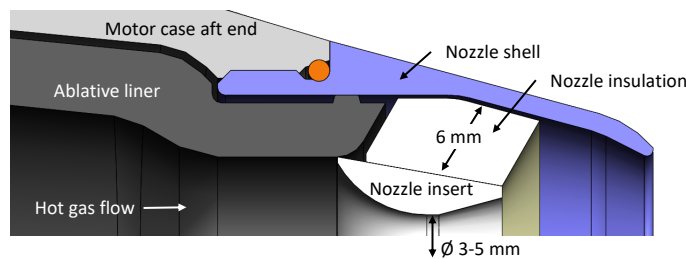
Section view of the nozzle, with the nozzle shell as a separate part. The nozzle assembly consists of a shell, insulator and insert. The nozzle shell connects to the aft end of the motor case with screw threads.
